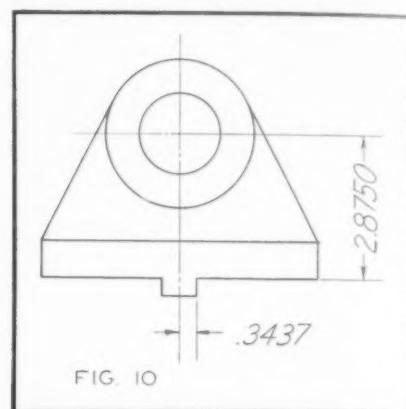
Working drawing for locating hole in a nut. Locating time: 2.5 minutes. Allowed tolerances: .005-in. Actual accuracy: .0001-in.
